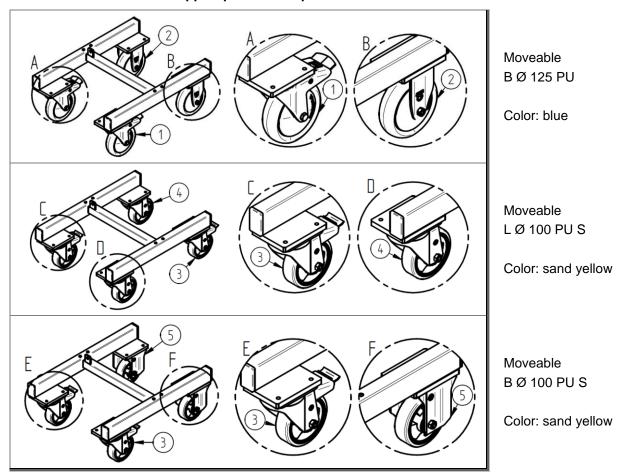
Parts list: Support placement option HE/HM casters with bolt hole ZZ.982.0068
